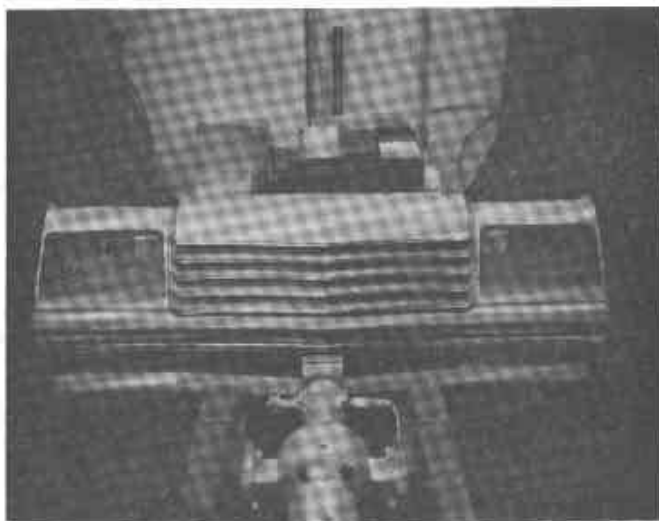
DODGE MIRADA BUMPER ASSEMBLY
